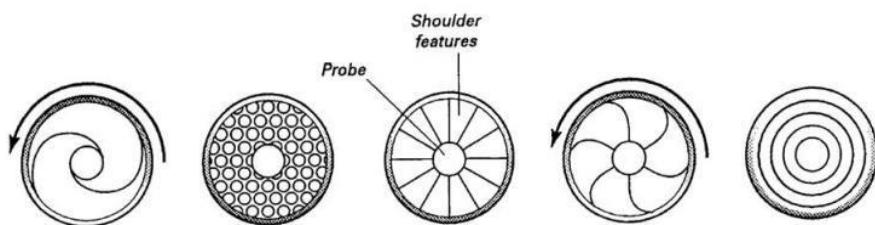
Types of surface areas of tool shoulder [10-1]
